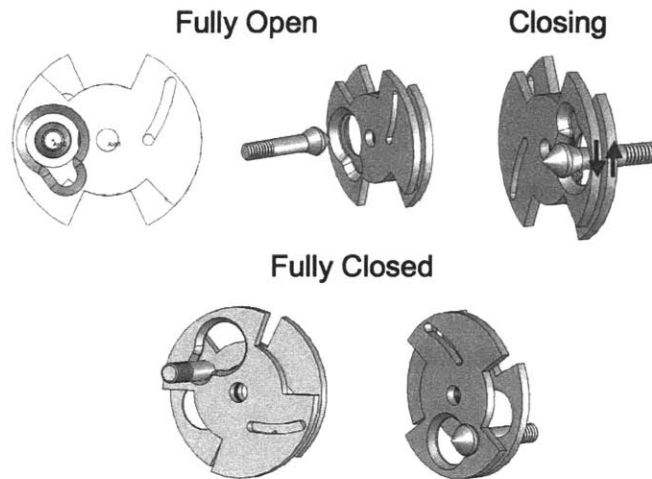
This illustrates how the counter-rotating disks are used to lock the pin. The pin is both pinched and wedged.
